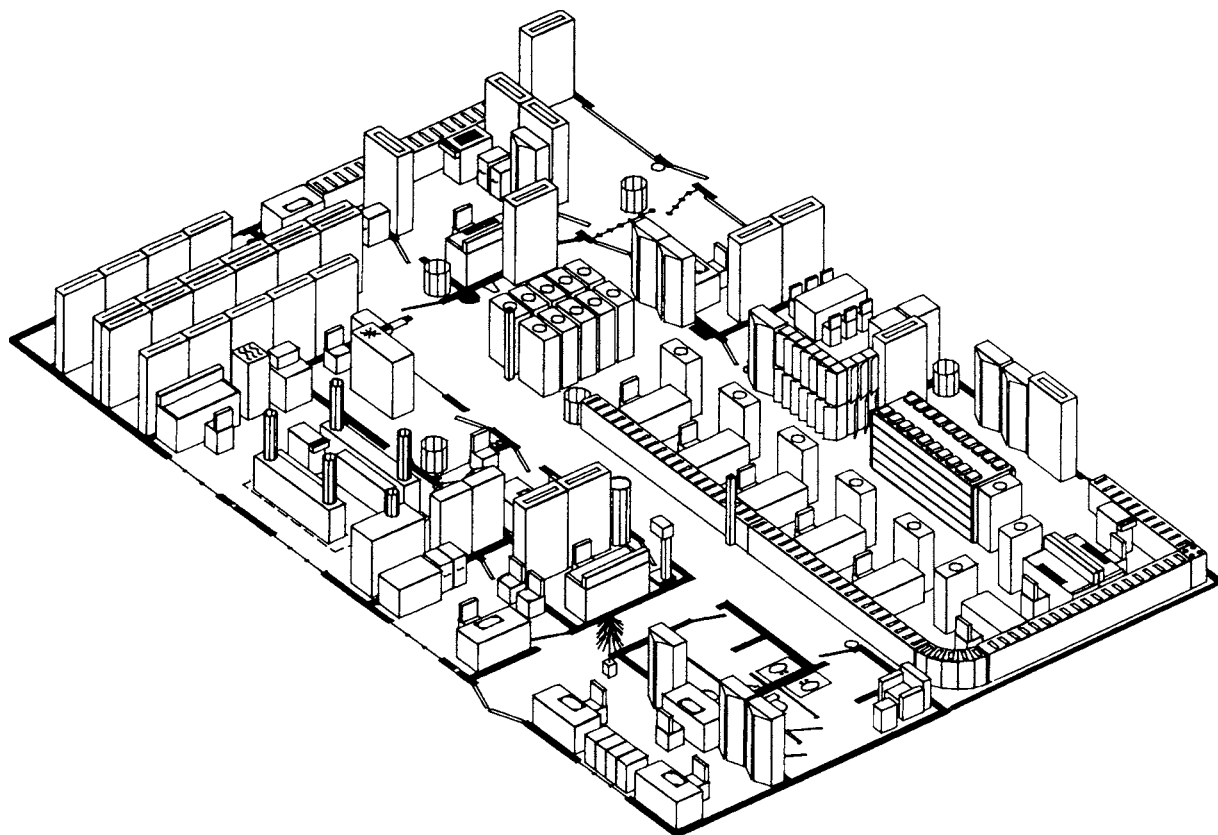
A three-dimensional computer-generated detailed layout of the same area shown in Fig. 12.1.8. (Source: Cederleaf, "Plant Layout & Flow Improvement," McGraw-Hill.)
